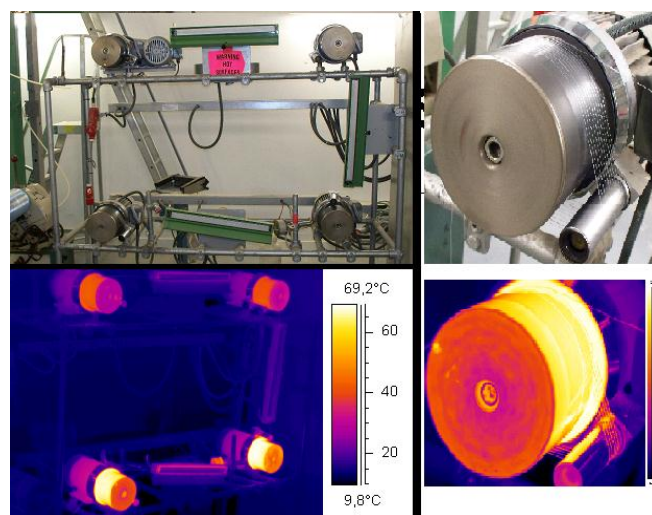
Infrared image of multi-stage hot drawing frame and one of the drawing rollers
